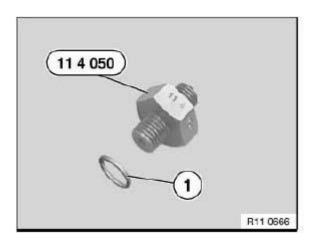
Identifying Special Tool (11 4 050) With Sealing Ring Courtesy of BMW OF NORTH AMERICA, INC.
